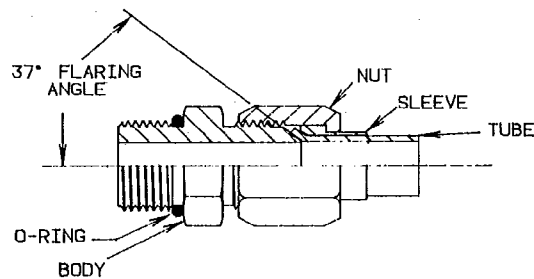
Typical fitting assembly showing body, O-ring, nut, sleeve and tube.
